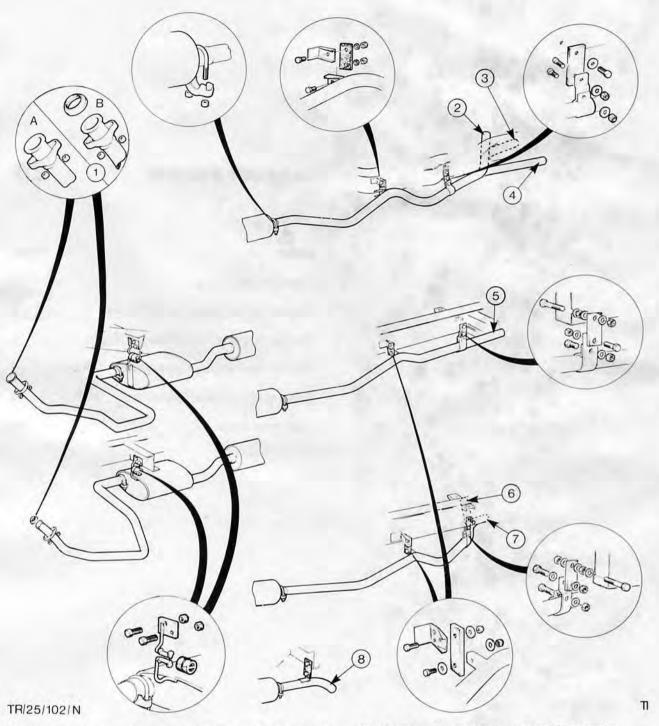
Exhaust layout for Transit variants fitted with the 4 cylinder in-line OHV (Kent) engine and 4 cylinder Diesel (York) engine
